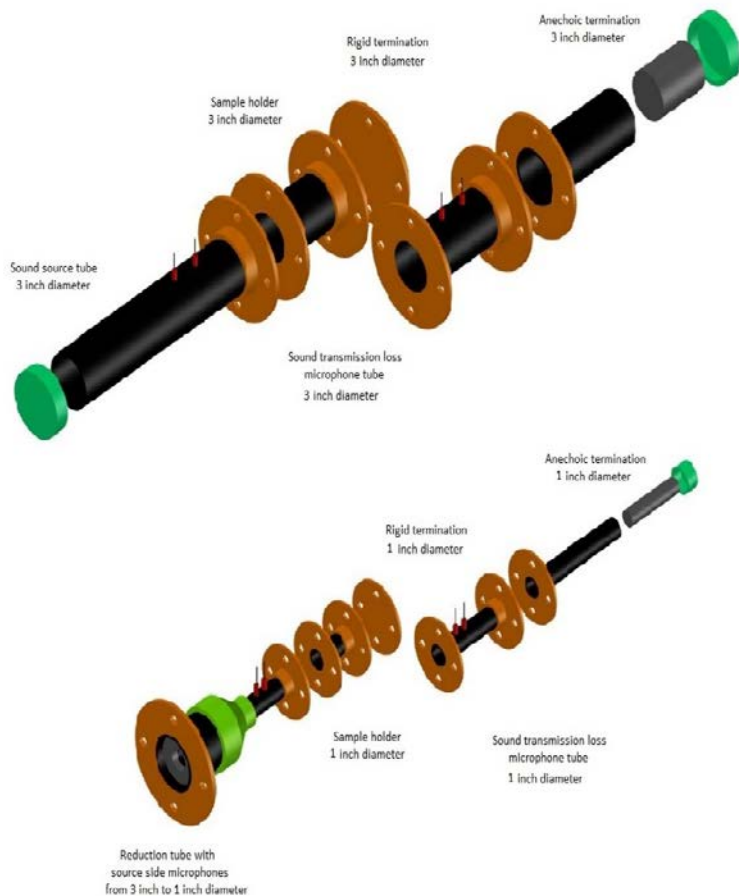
Assembled tubes: large and small tube for alpha; assembled TL tube
